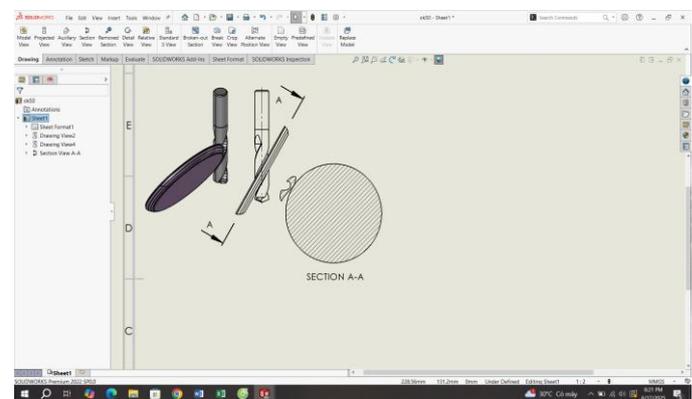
Verify the contact between the grinding disc surface and the drill groove surface (D=50)
